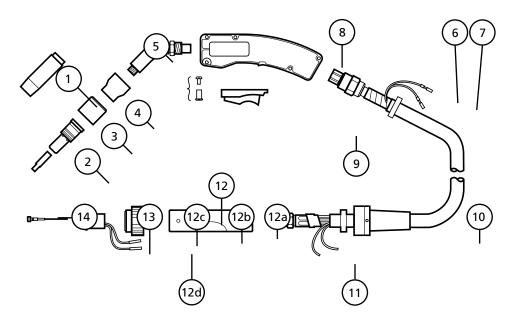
BEQ3012AR7CE (390 amp) Gun and Cable Assembly
